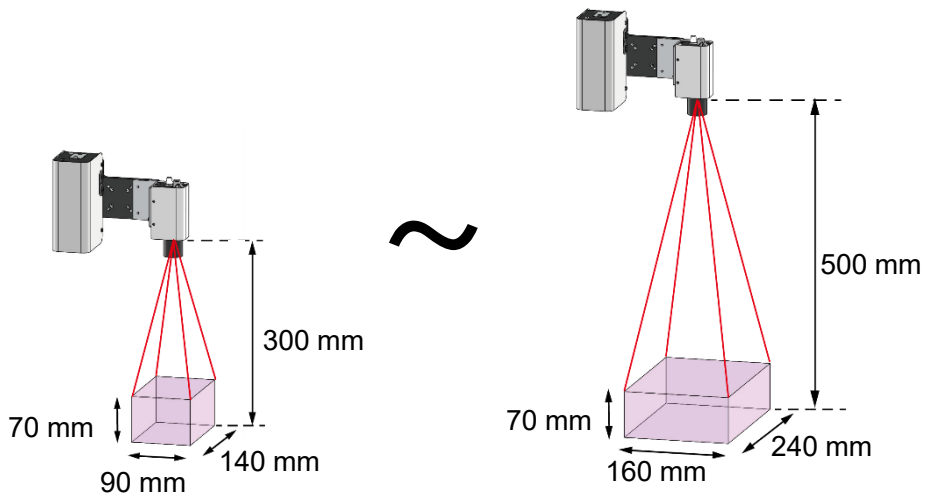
Measurement view when attaching a camera to the mounting base (small) in Fig. 3-9 with an optional lens for enlarged view
